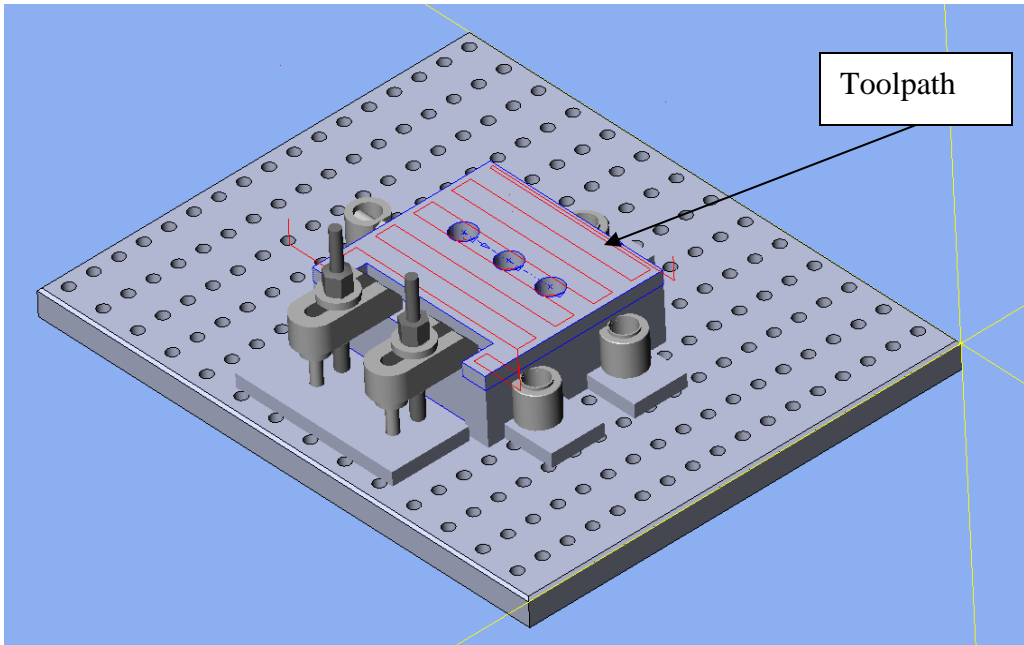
Toolpath for machining the workpiece using original fixture design
